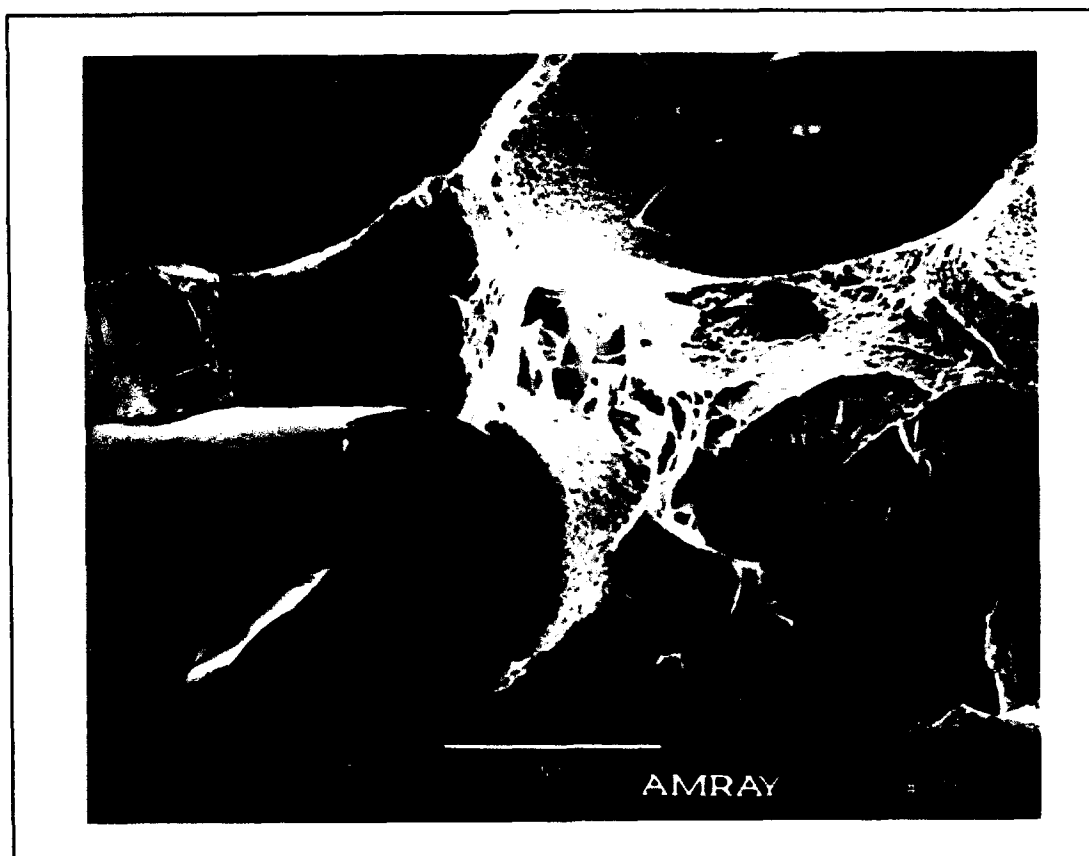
Fracture Surface with Mixed Brittle and Ductile Failure Regions
